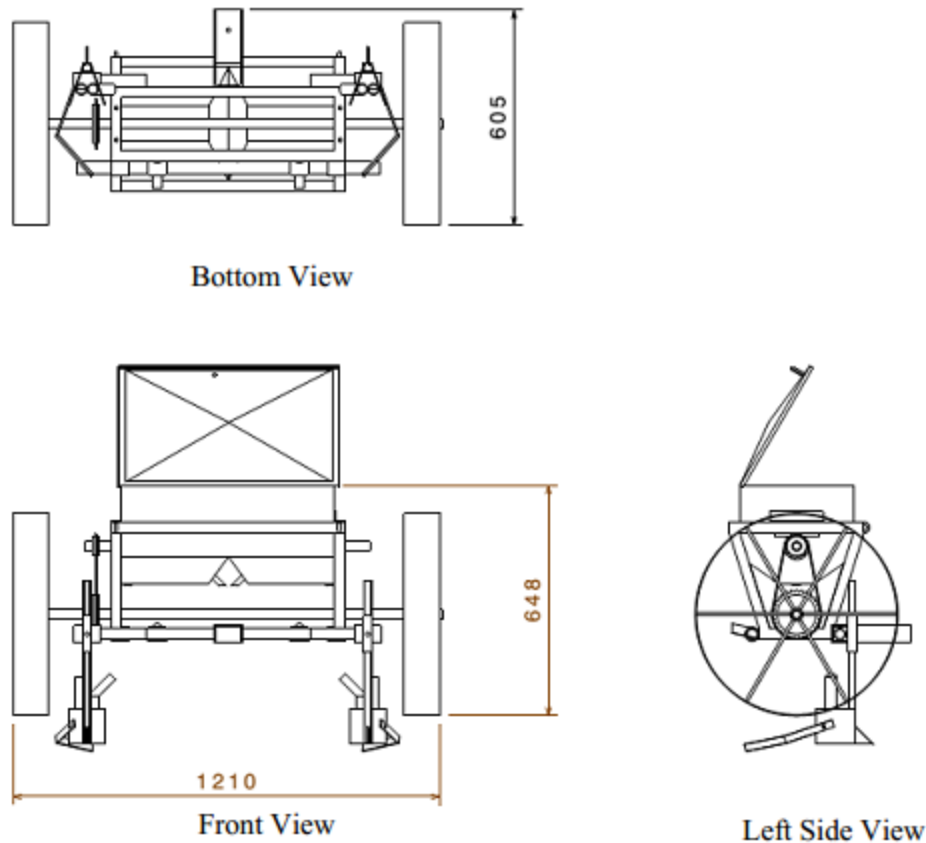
Diagram of the seed planter indicating necessary dimensions (dimensions are in mm).
